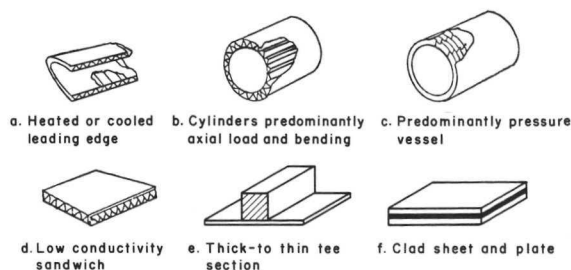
Typical applications of roll-welded structures.
